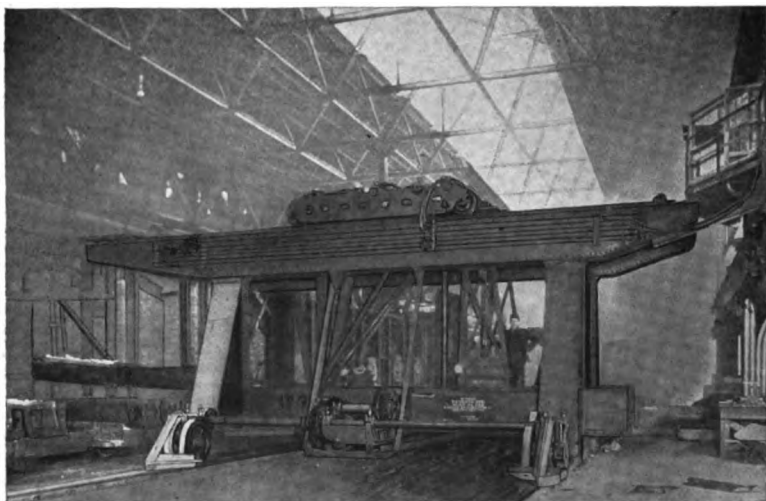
FLOOR CHARGING MACHINE FOR OPEN HEARTH FURNACE
